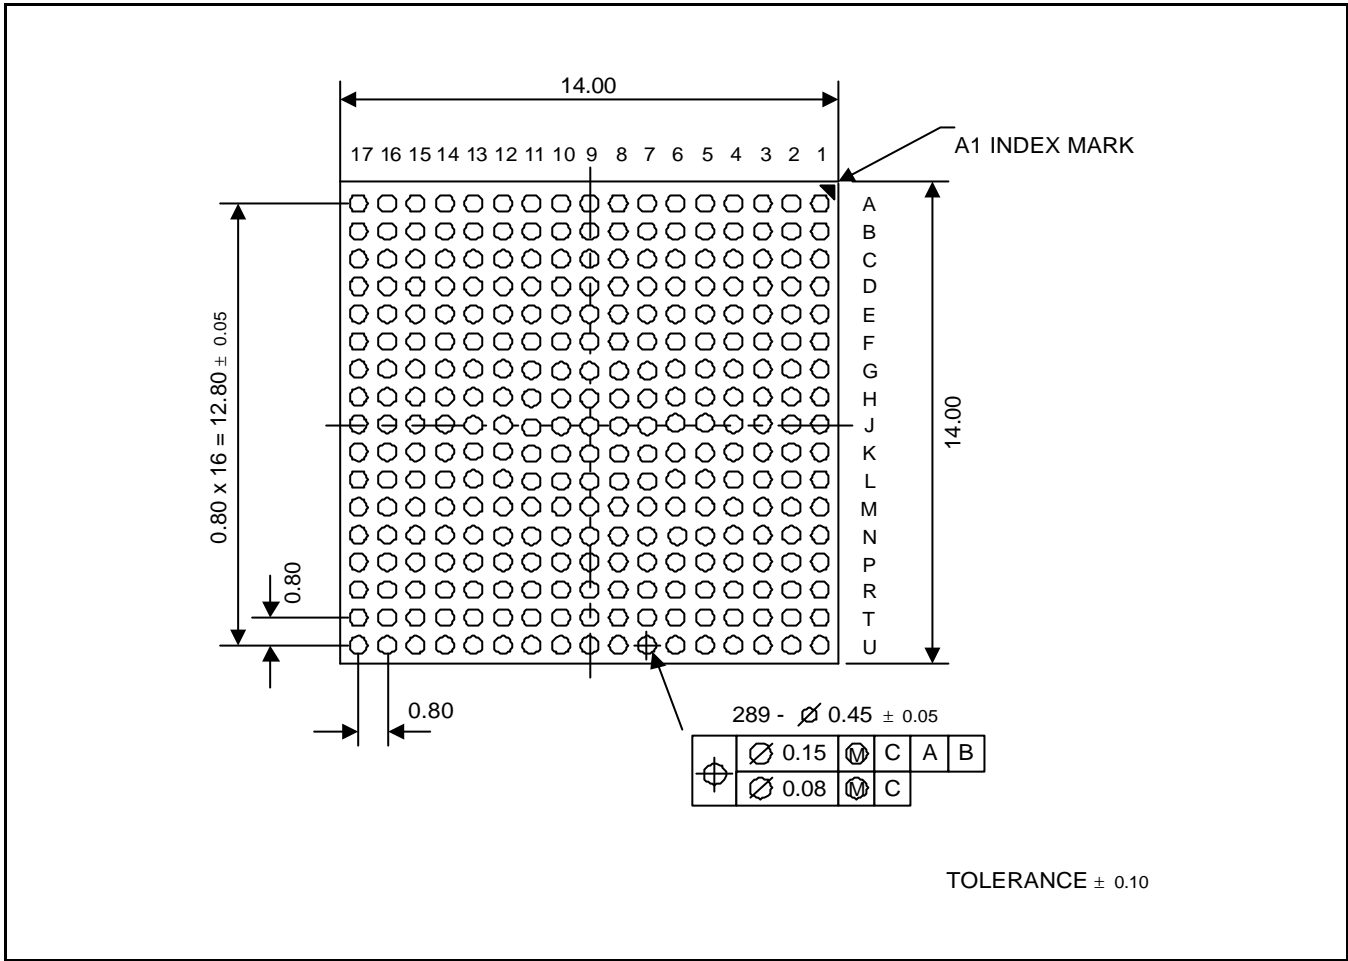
289-FBGA-1414 Package Dimension 2 (Bottom View)
